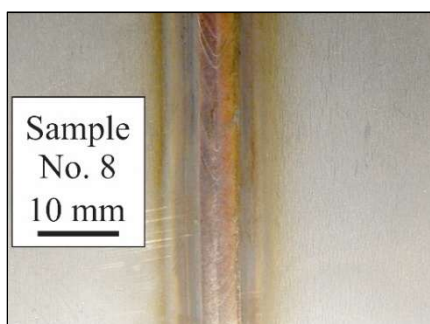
Specimen N° 8 - TAG, 80 A, no filler material
